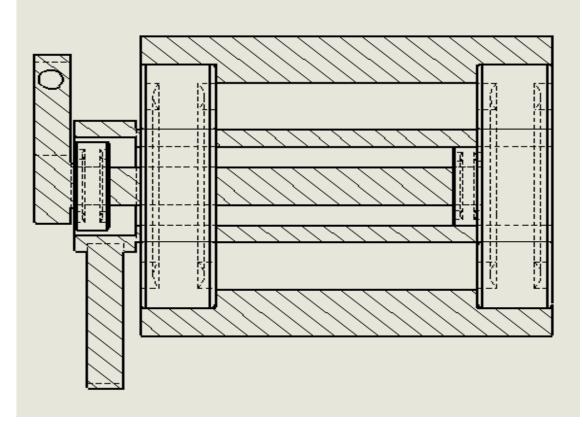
The scheme of basic units for loading and securing the hinge bearings
